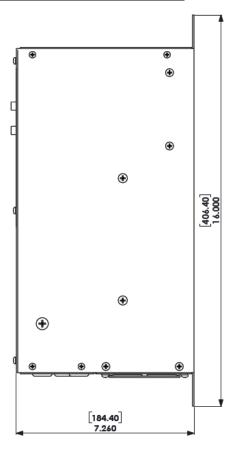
M3712 K7 Chassis Dimensional Outline for 30HP and 50HP Unit
